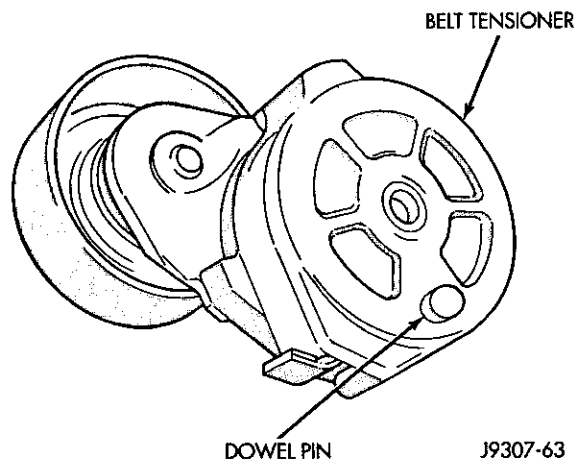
Tensioner Dowel Pin—5.9L HDC-Gas Engine
